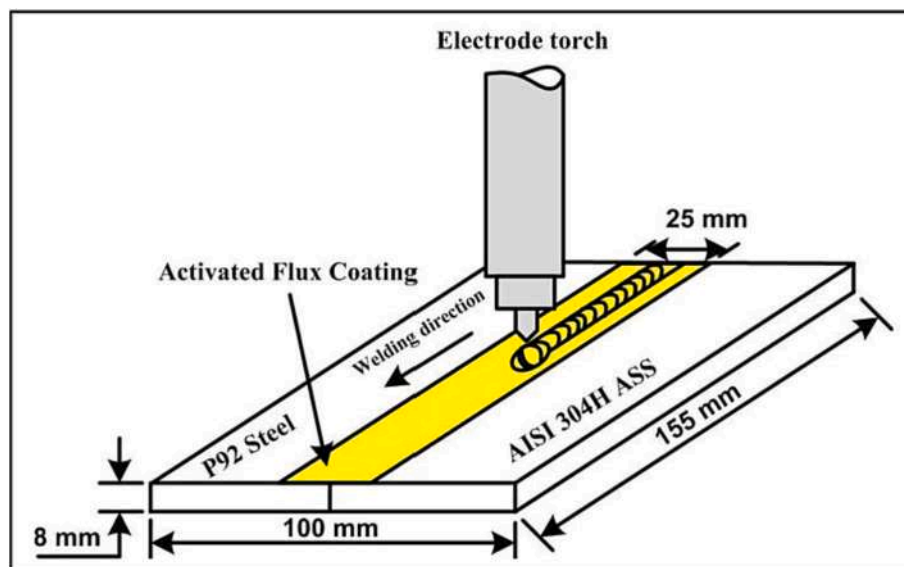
Schematic of coating pattern and torch position for dissimilar weld formation of P92 steel-AISI 304H ASS developed using A-TIG welding.
